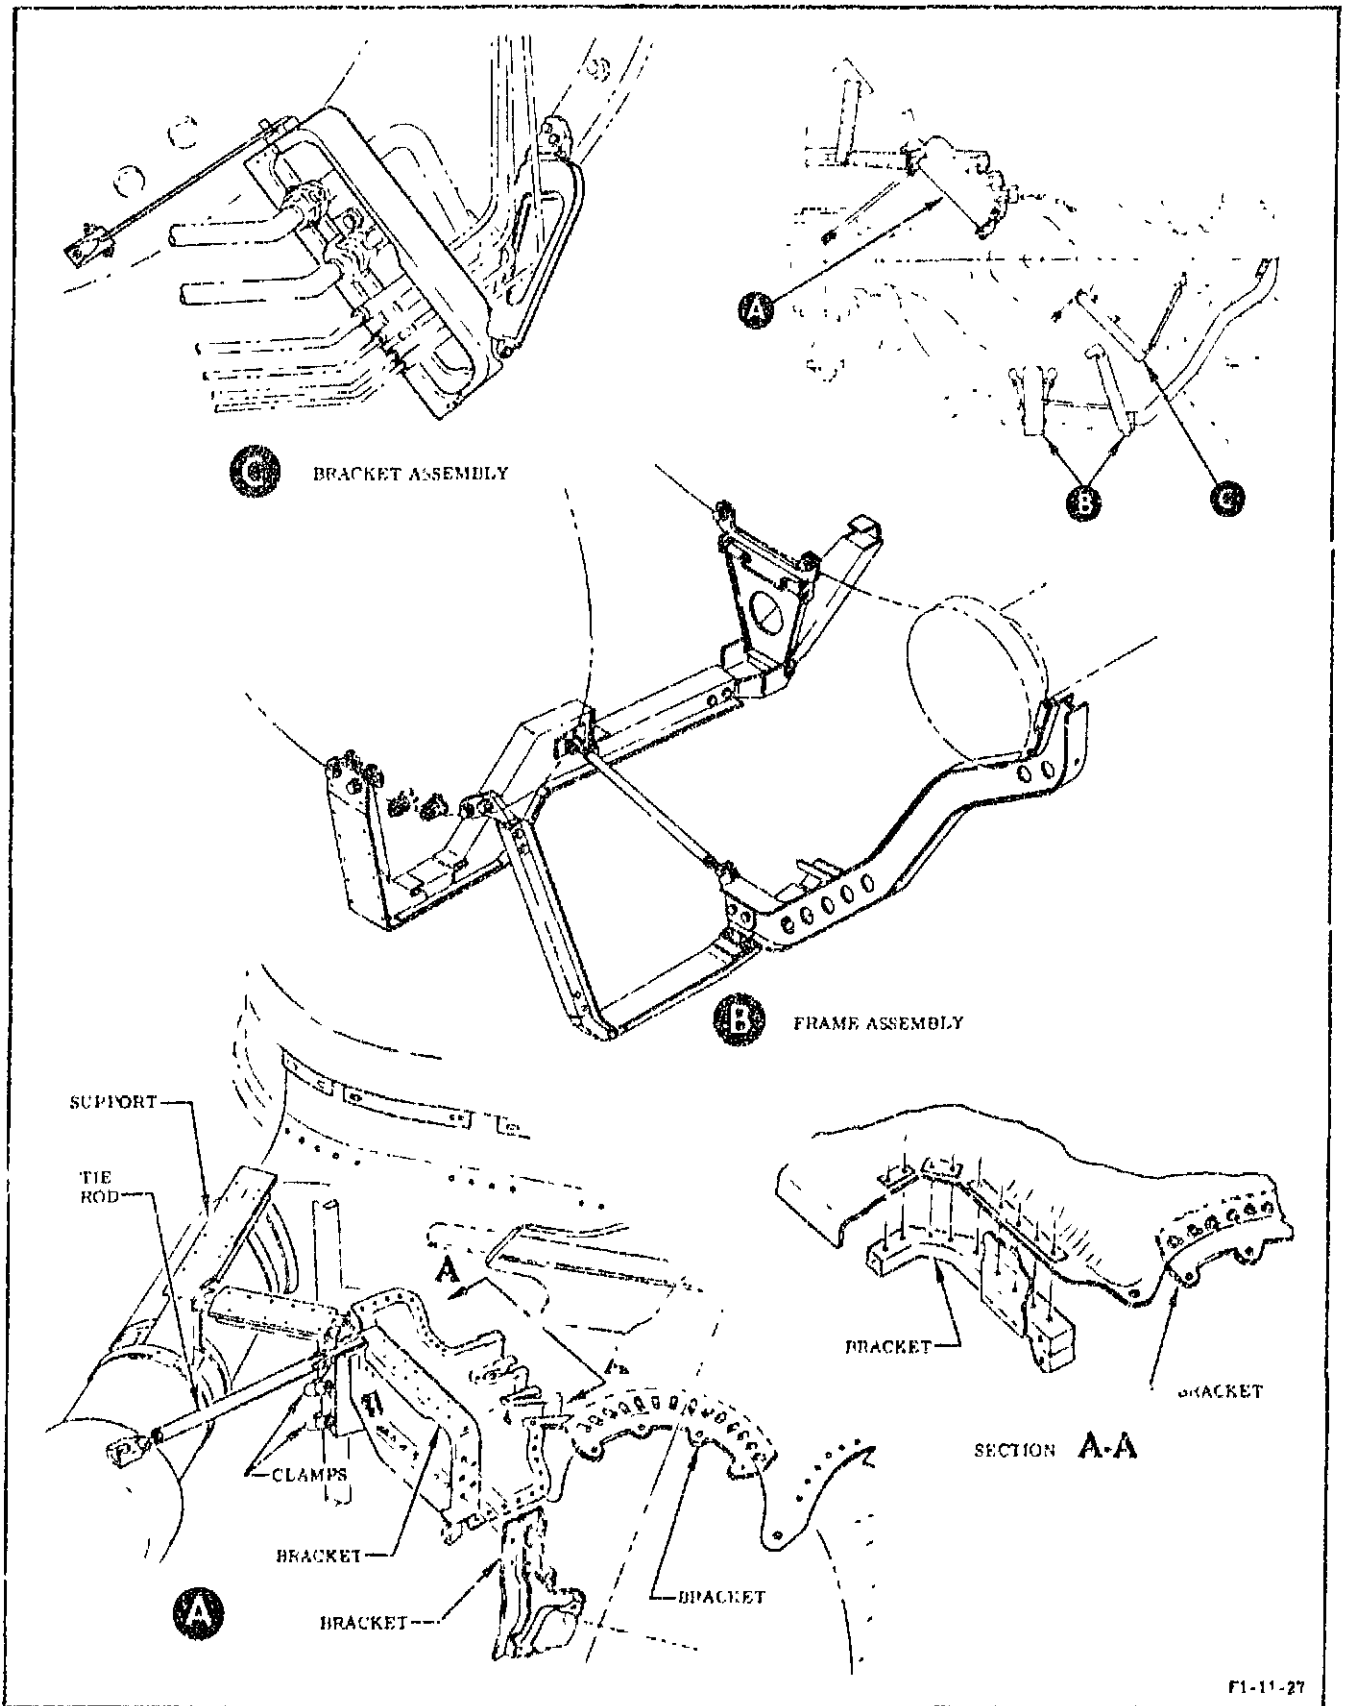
Thermal Insulation Installation Requirements Prior to Stage Shipment to KSC
